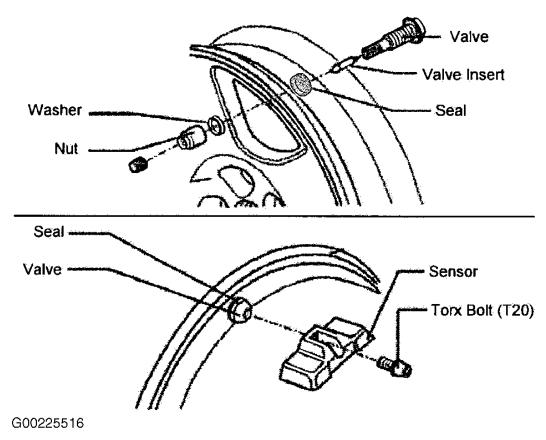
Exploded View Of Tire Pressure Sensor Courtesy of VOLKSWAGEN UNITED STATES, INC.
